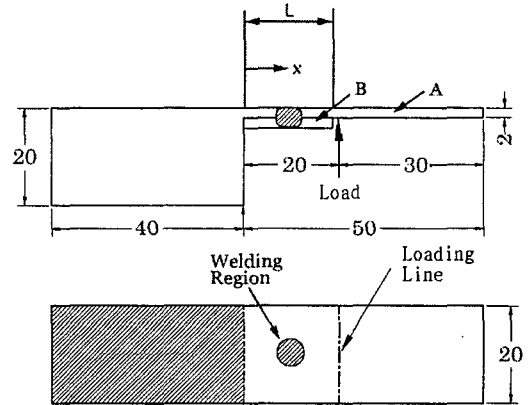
Dimensions of the specimen used for measurement of out-of-plane displacement (unit: mm)
